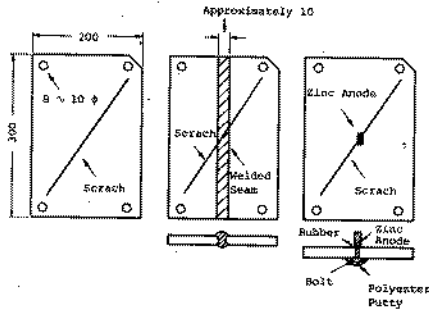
Shape and Dimension of Coated Specimens (mm)
